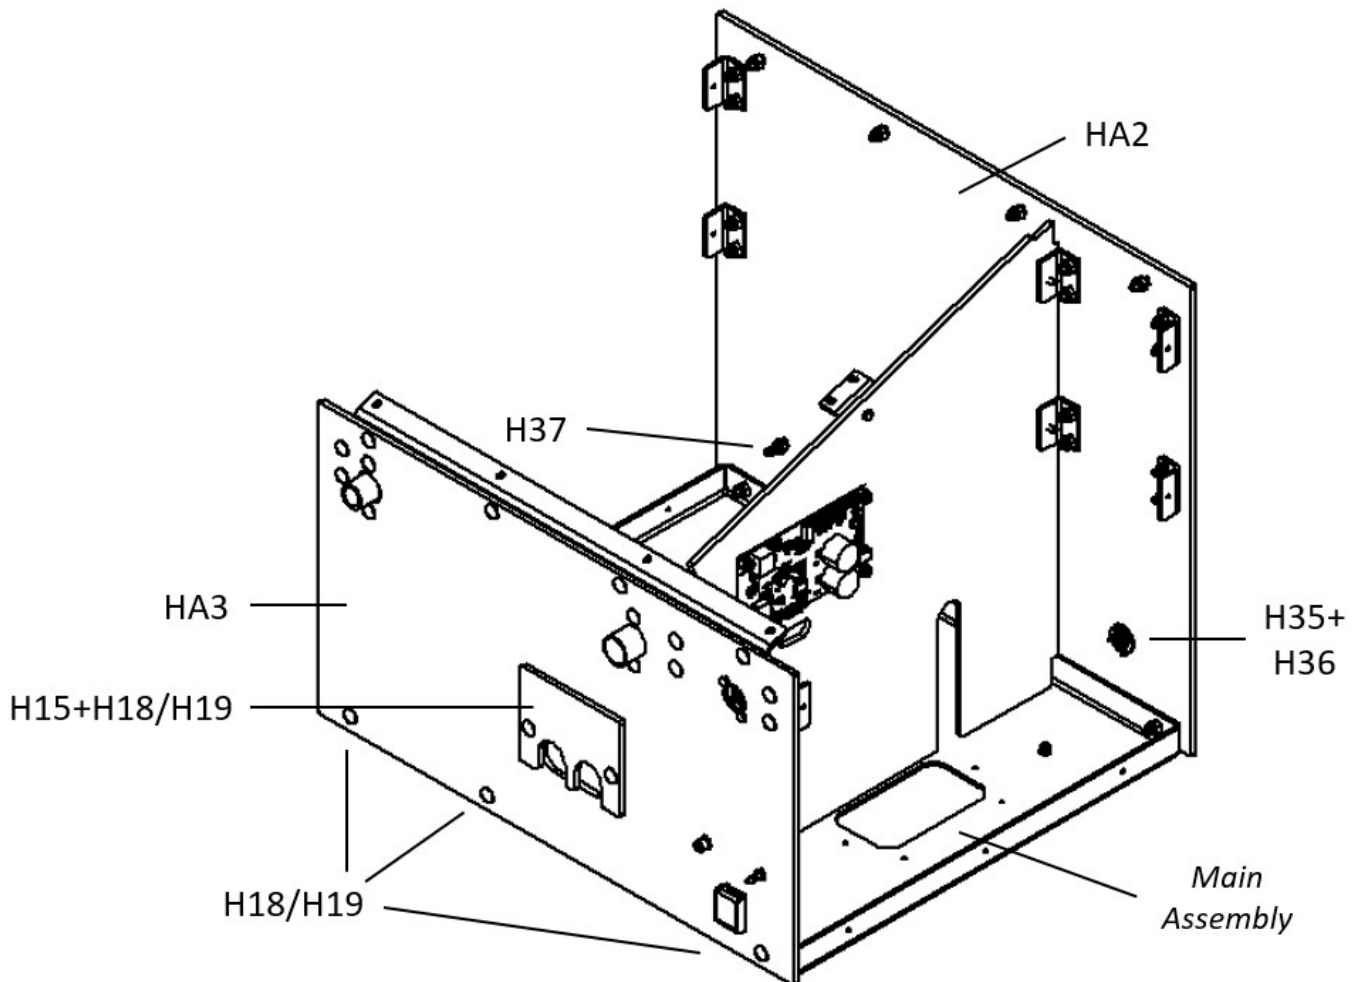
Mount Front and Back Plate Assembly to Main Assembly
